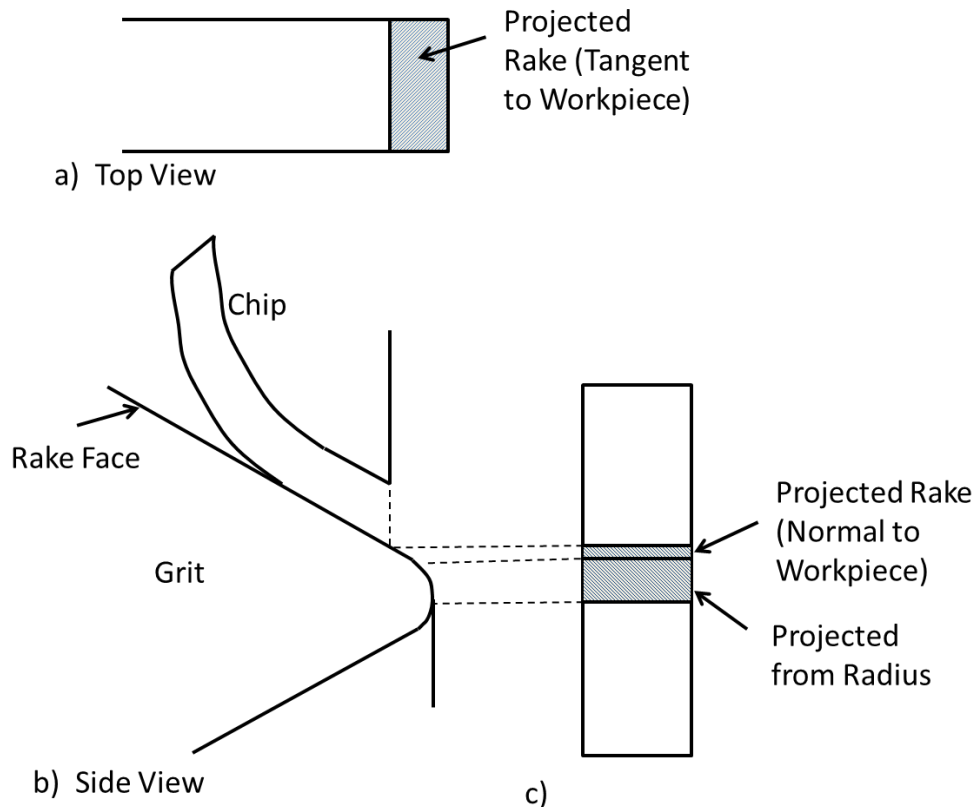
Negative Rake Flank Area a) Top View and projection of rake area, b) Front view, c) right side view and projection of flank area
